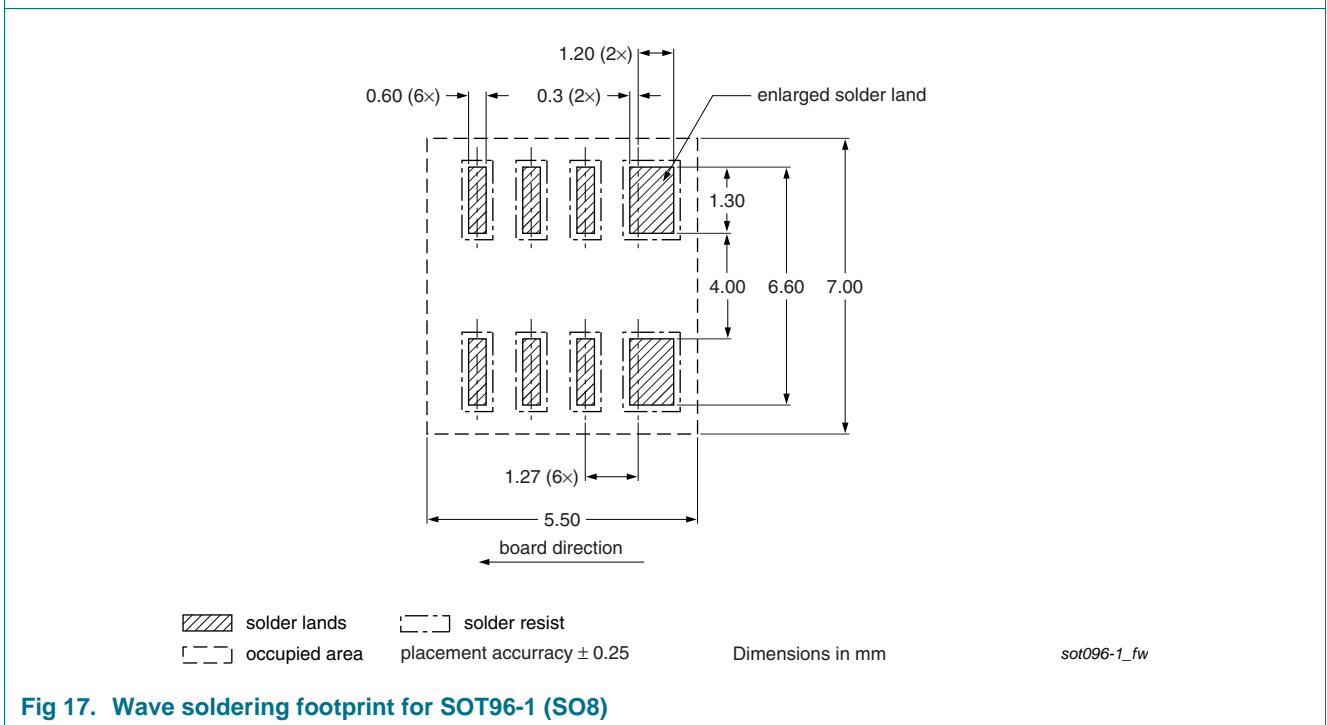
Wave soldering footprint for SOT96-1 (SO8)
